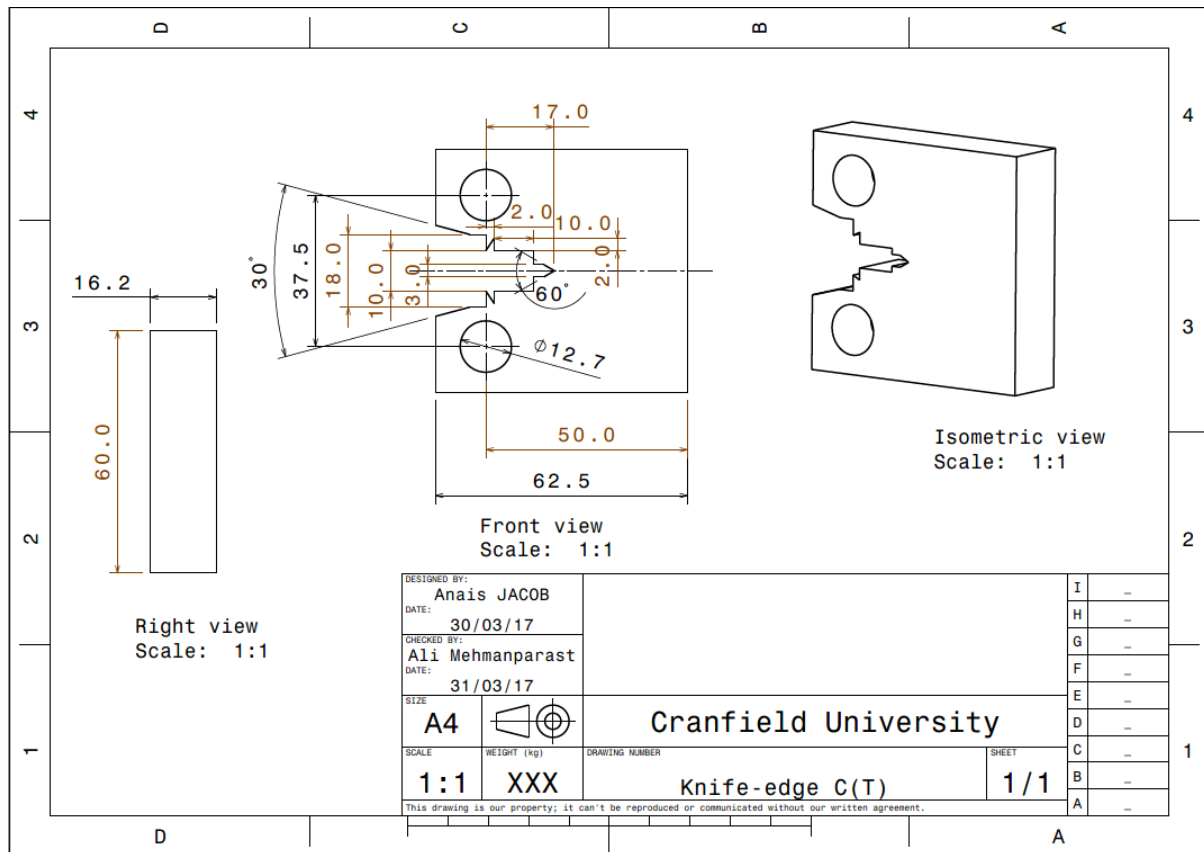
Technical drawing of the knife-edge C(T) sample tested
